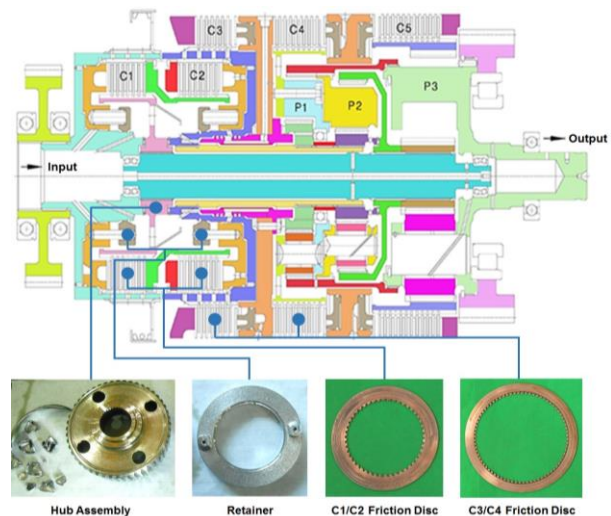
Locations of damaged parts found in the range pack of the transmission by phased disassembly and inspection
